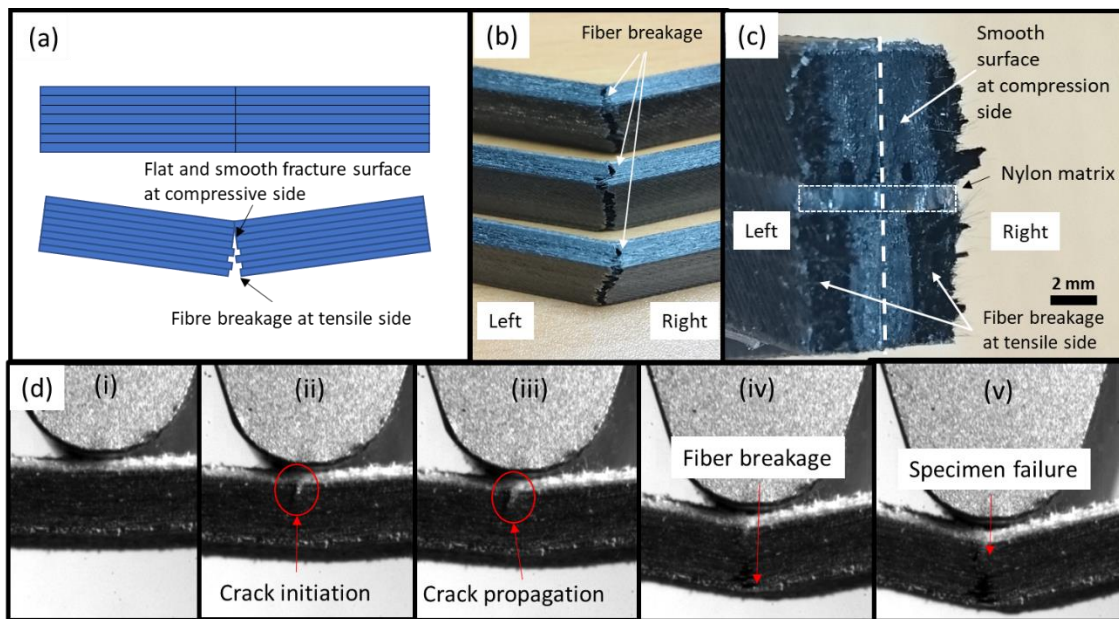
(a) schematics illustrating fracture mode of carbon FRTP undergone flexural test (b) fibers breakage occurred at the outer most layers which are in tensile (c) cross section view of the fracture surface (d) image sequence of the flexural test captured using high speed camera
